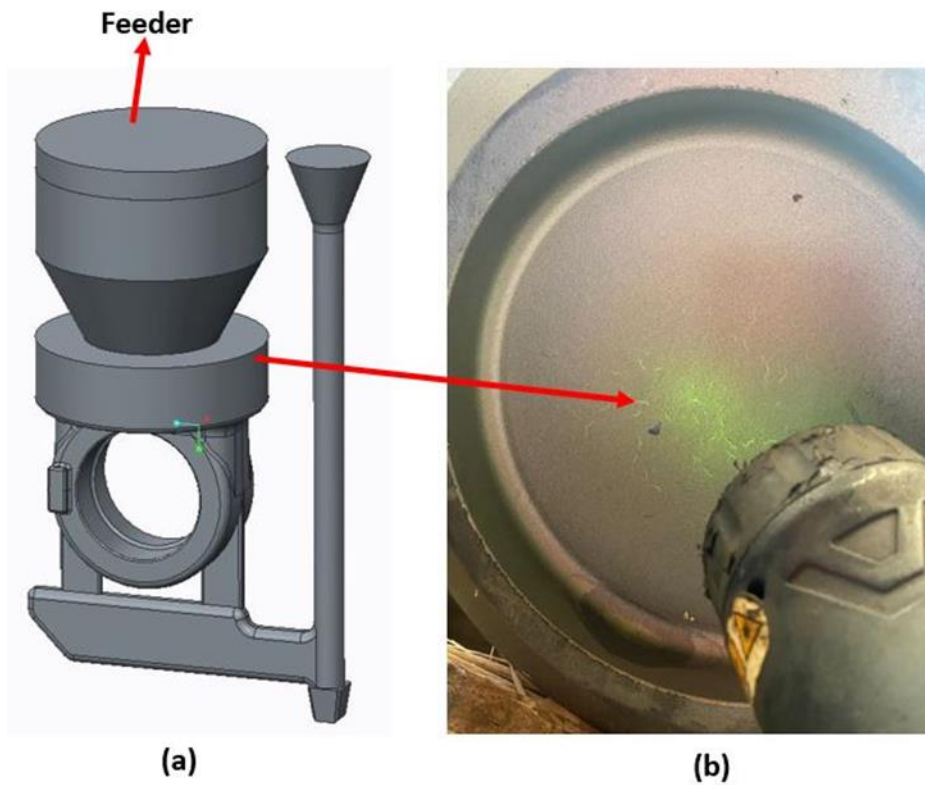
(a); The image of the molding design of the casting part, (b); The locations and morphologies of the defects on the flange of the casting part under UV light after machining.
